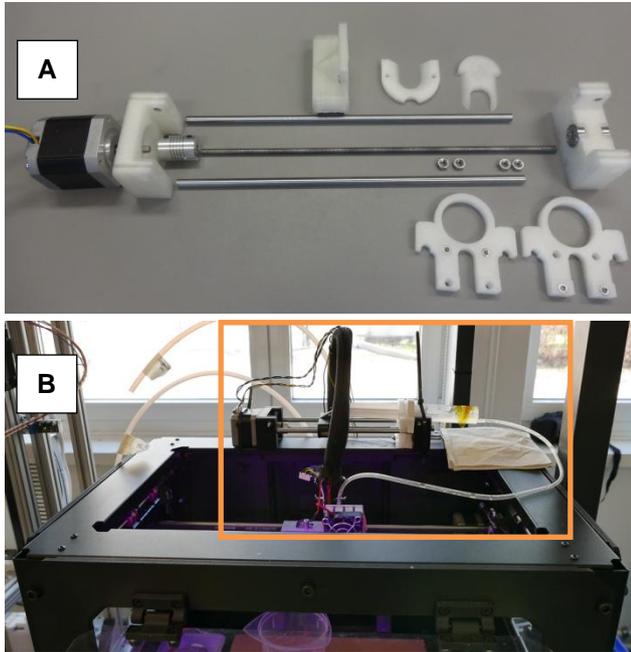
(A) 3D-printed syringe pump by Wjien et al. [5] (printed parts are white) and (B) printer setup of this work using Makerbot Replicator 2X equipped with 3D-printed syringe pump (marked).
